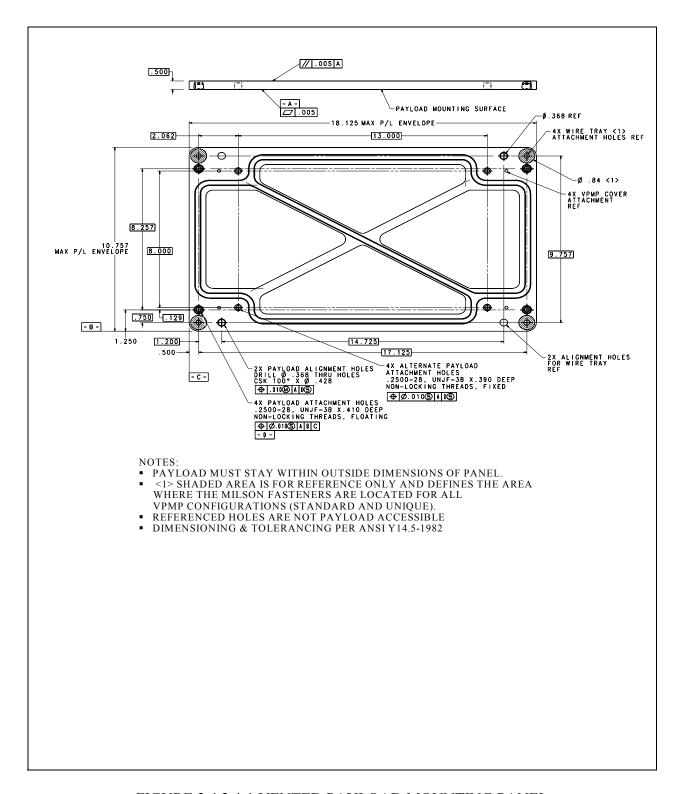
VENTED PAYLOAD MOUNTING PANEL (SHEET 1 OF 3)
